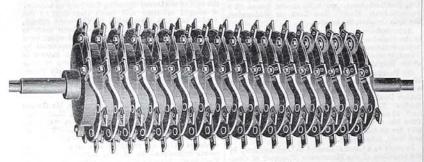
SPECIAL STEEL-TOOTH CYLINDER.
